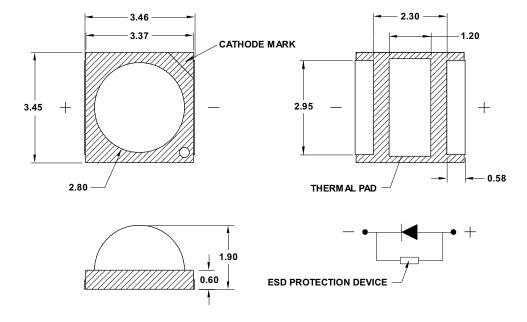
Package Drawing for AUV4-SxD1-0xx0J
